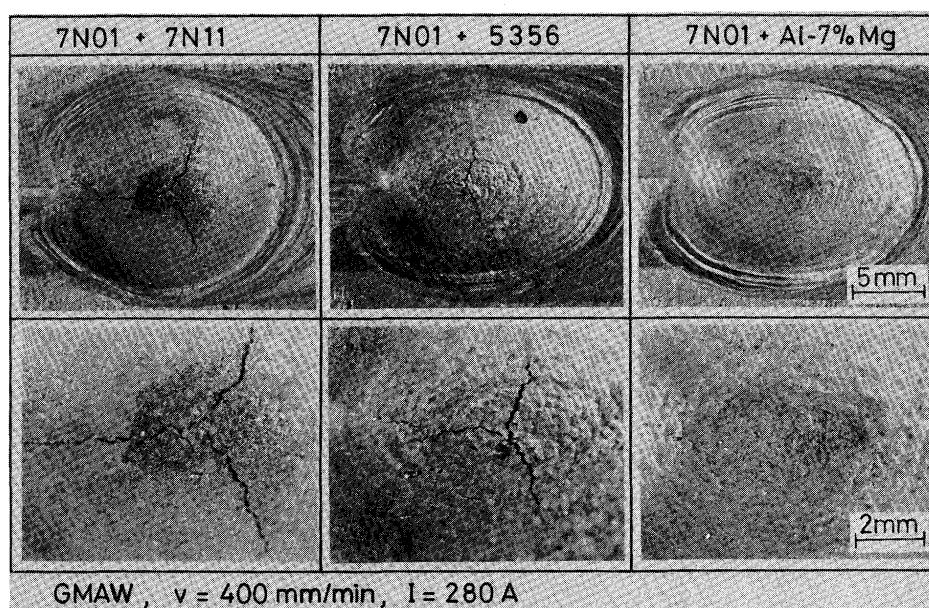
Typical appearances of crater cracking occurred in GMA weld crater (base metal : 7N01, welding wire : 7N11, 5356 and Al-7% Mg)
